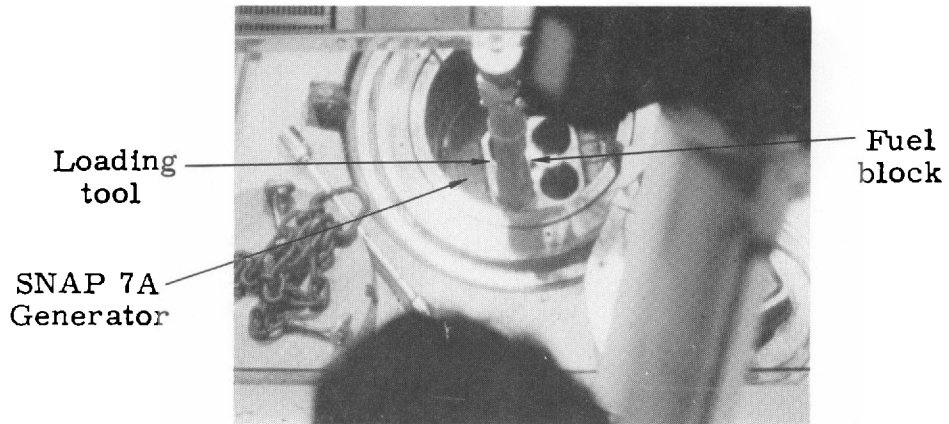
The Second Sr-90 Capsule Is Inserted into Generator Fuel Block (closeup view)
